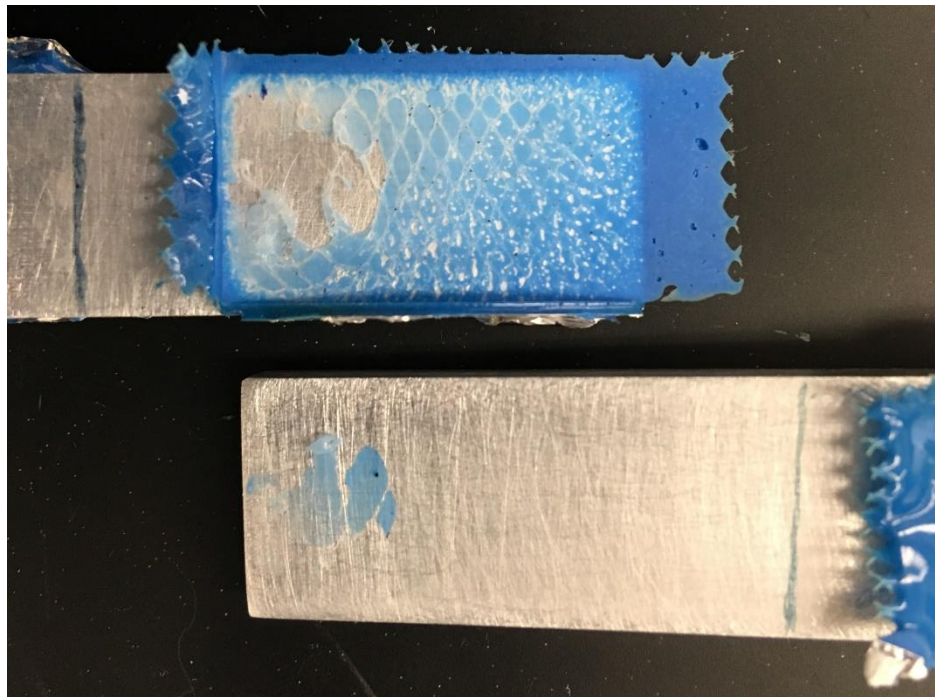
SLJ-Sample 5-Fracture Surface
